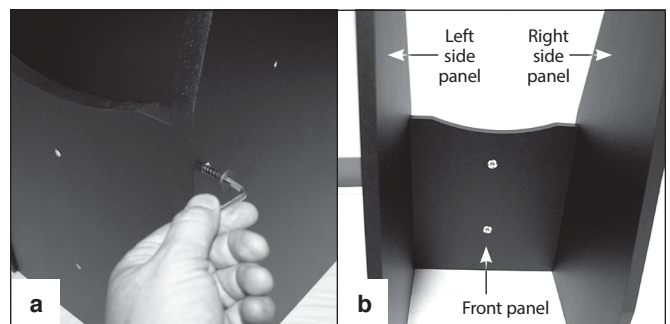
a) Attach the two side panels to the front panel with the base assembly screws and included Allen wrench. b) The side panel with the two holes for the eyepiece rack should go on the left side.
